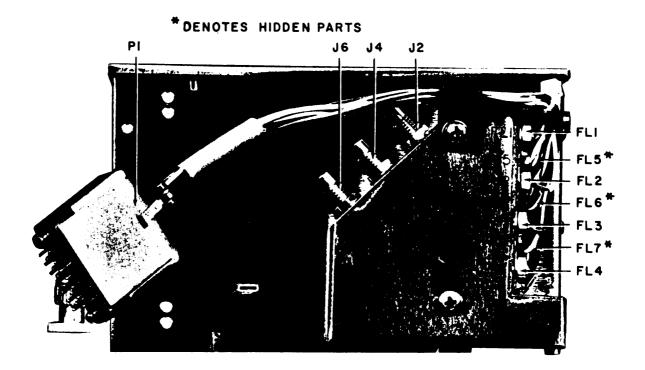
Type WJ-9120 0.5-30 MHz Tuner Assembly, Rear View, Location of Components
